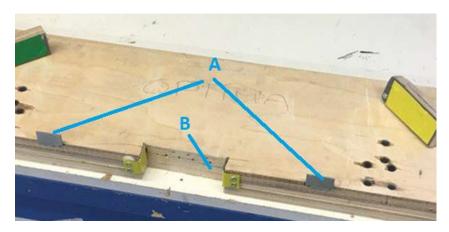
Design of the fixture. A - Metal stopper. B - Indent
